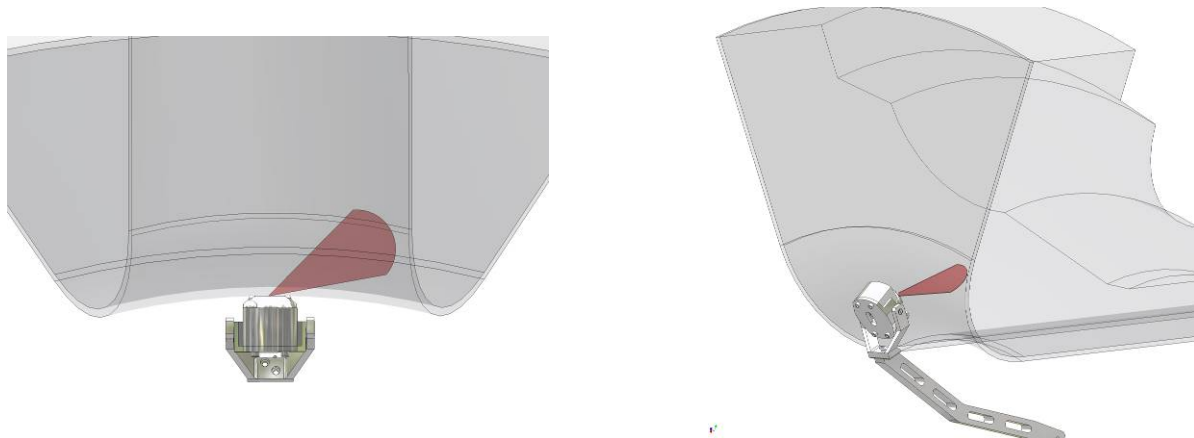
Inner Radii Inspection PA Probes Arrangement
